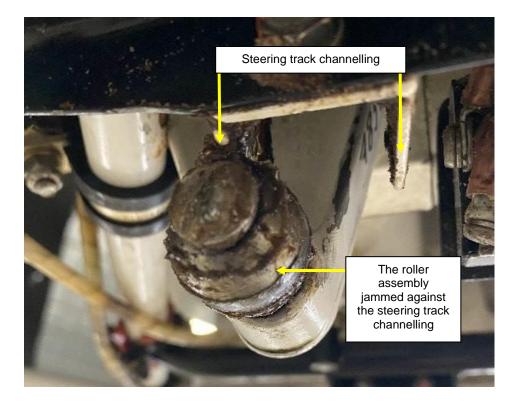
The roller assembly where it had exited the steering track and jammed the nose gear.
